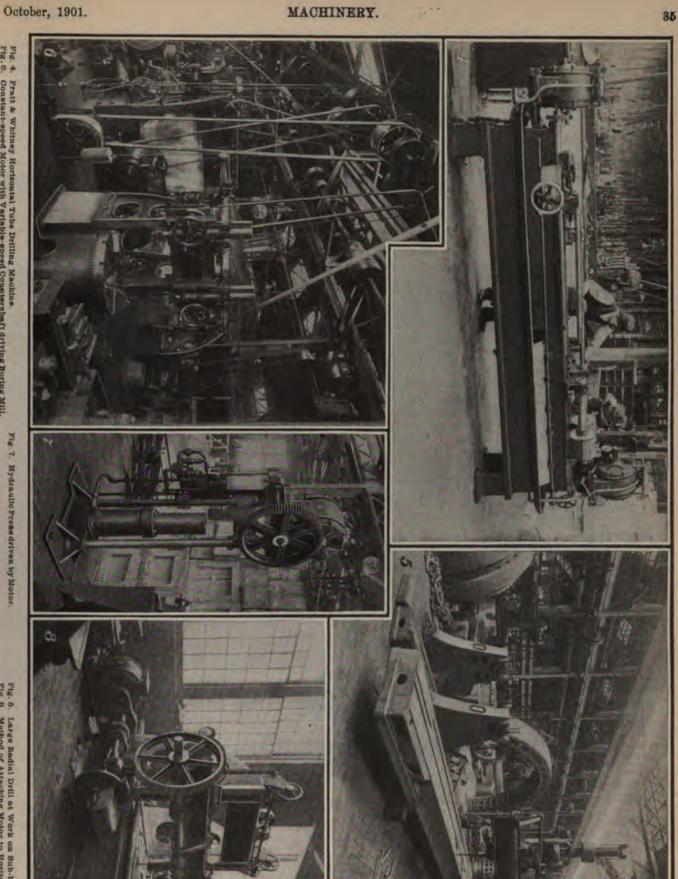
Large Radial Drill at Work on Sub-base for Electric Generator, Fig. 8. Method of Attaching Motor to Horizontal Milling Machine.
